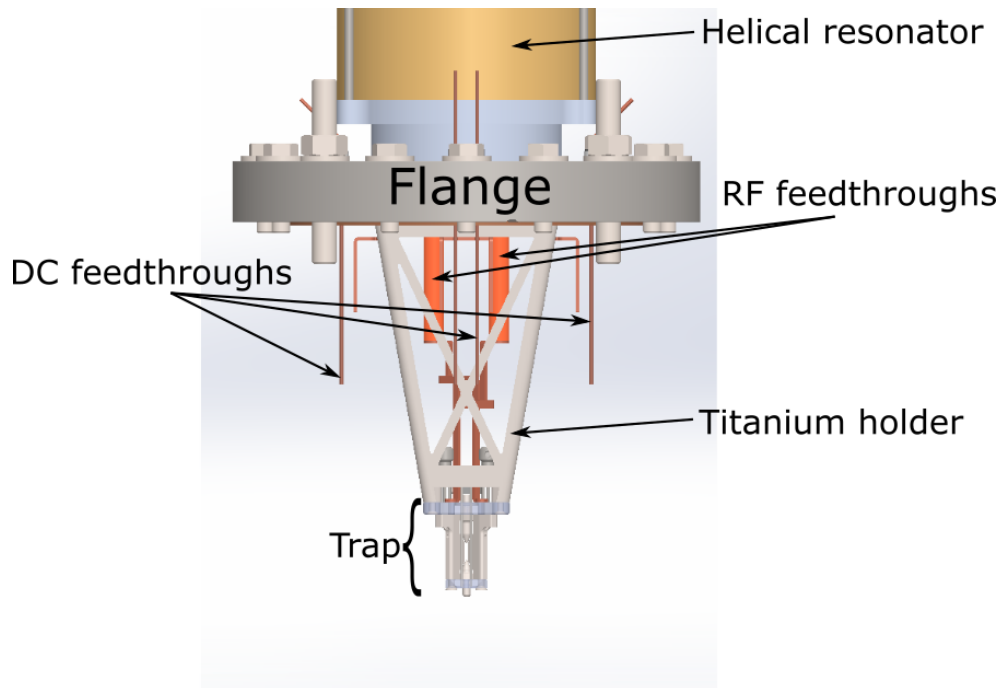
A drawing of the top flange (size DN100) assembly carrying the ion trap.
